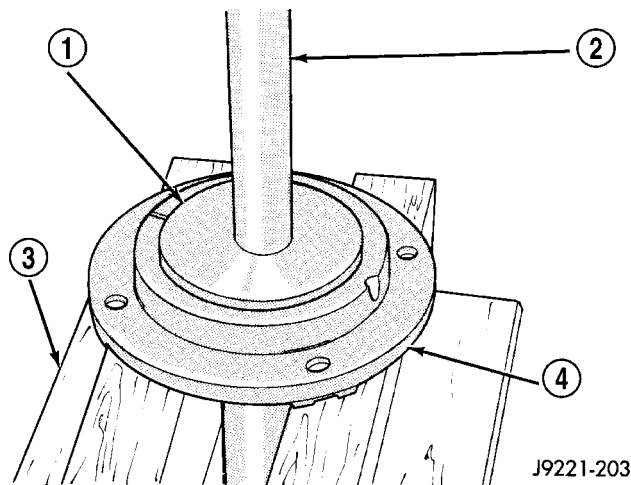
FRONT BEARING ON DRIVE GEAR
